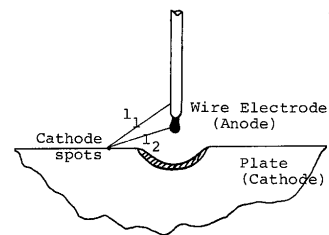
Schematic illustration of arc configuration of GMA welding.
